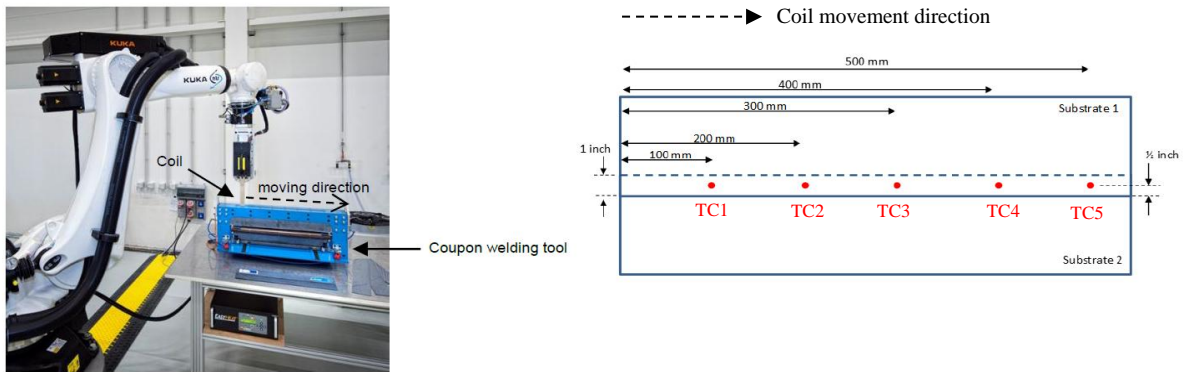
Induction welding setup and schematic illustration of the substrates and the position of thermocouples
